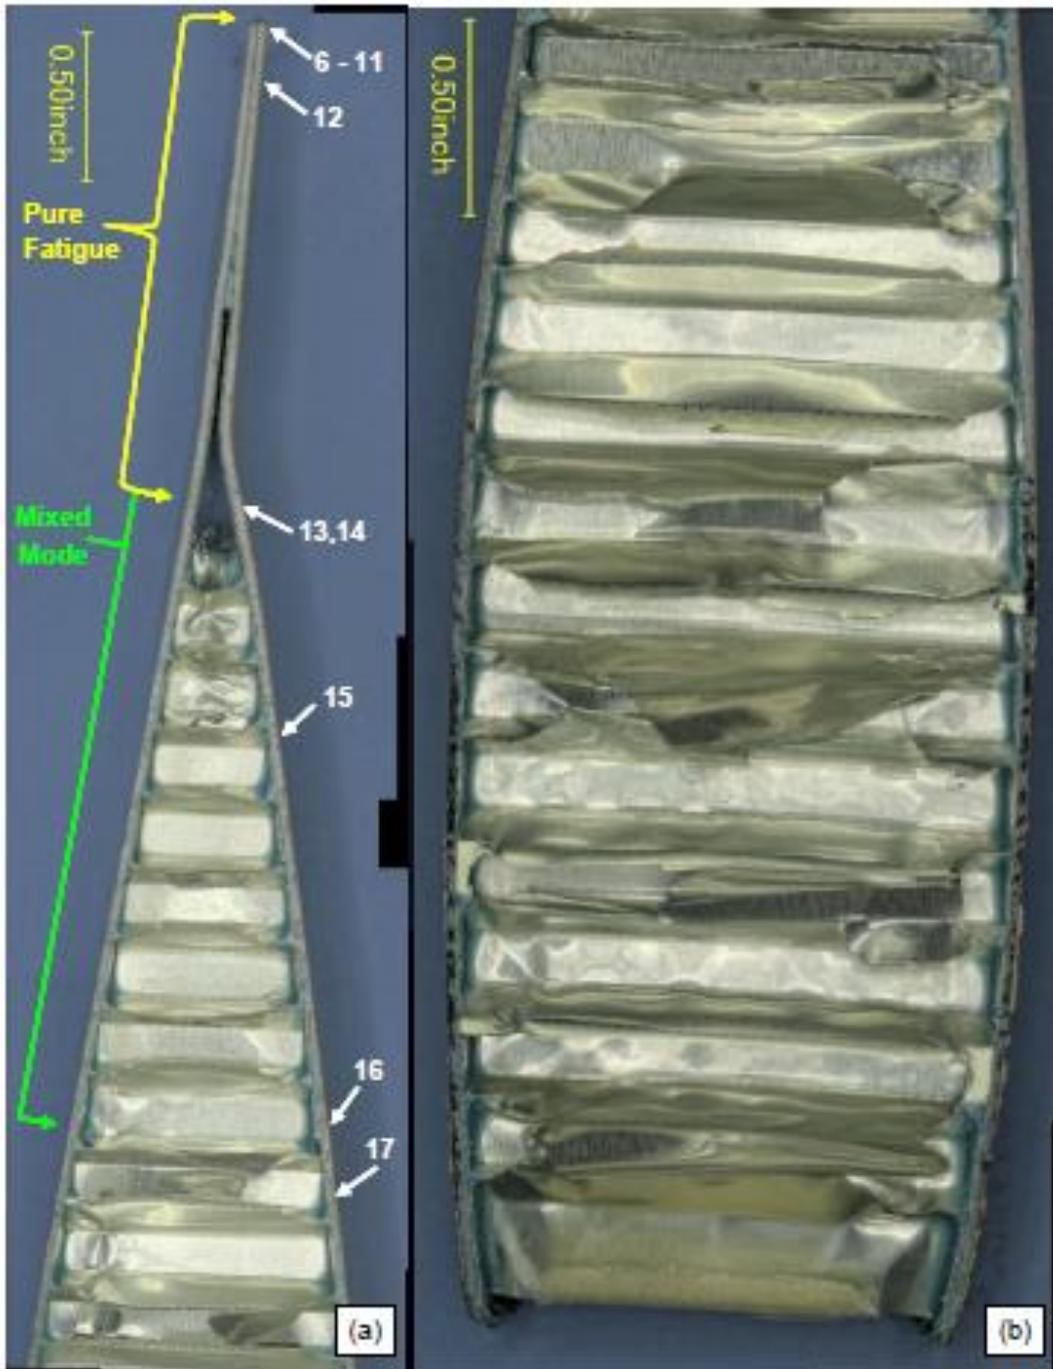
Montage of images showing the outboard face of the rotor blade fracture surface after intentional crack opening in the laboratory from (a) the trailing edge side and (b) the leading edge side. The areas later determined to be fatigue, mixed mode, and overstress are annotated on the figures. Areas examined in the SEM later are labeled by figure number in (a).
